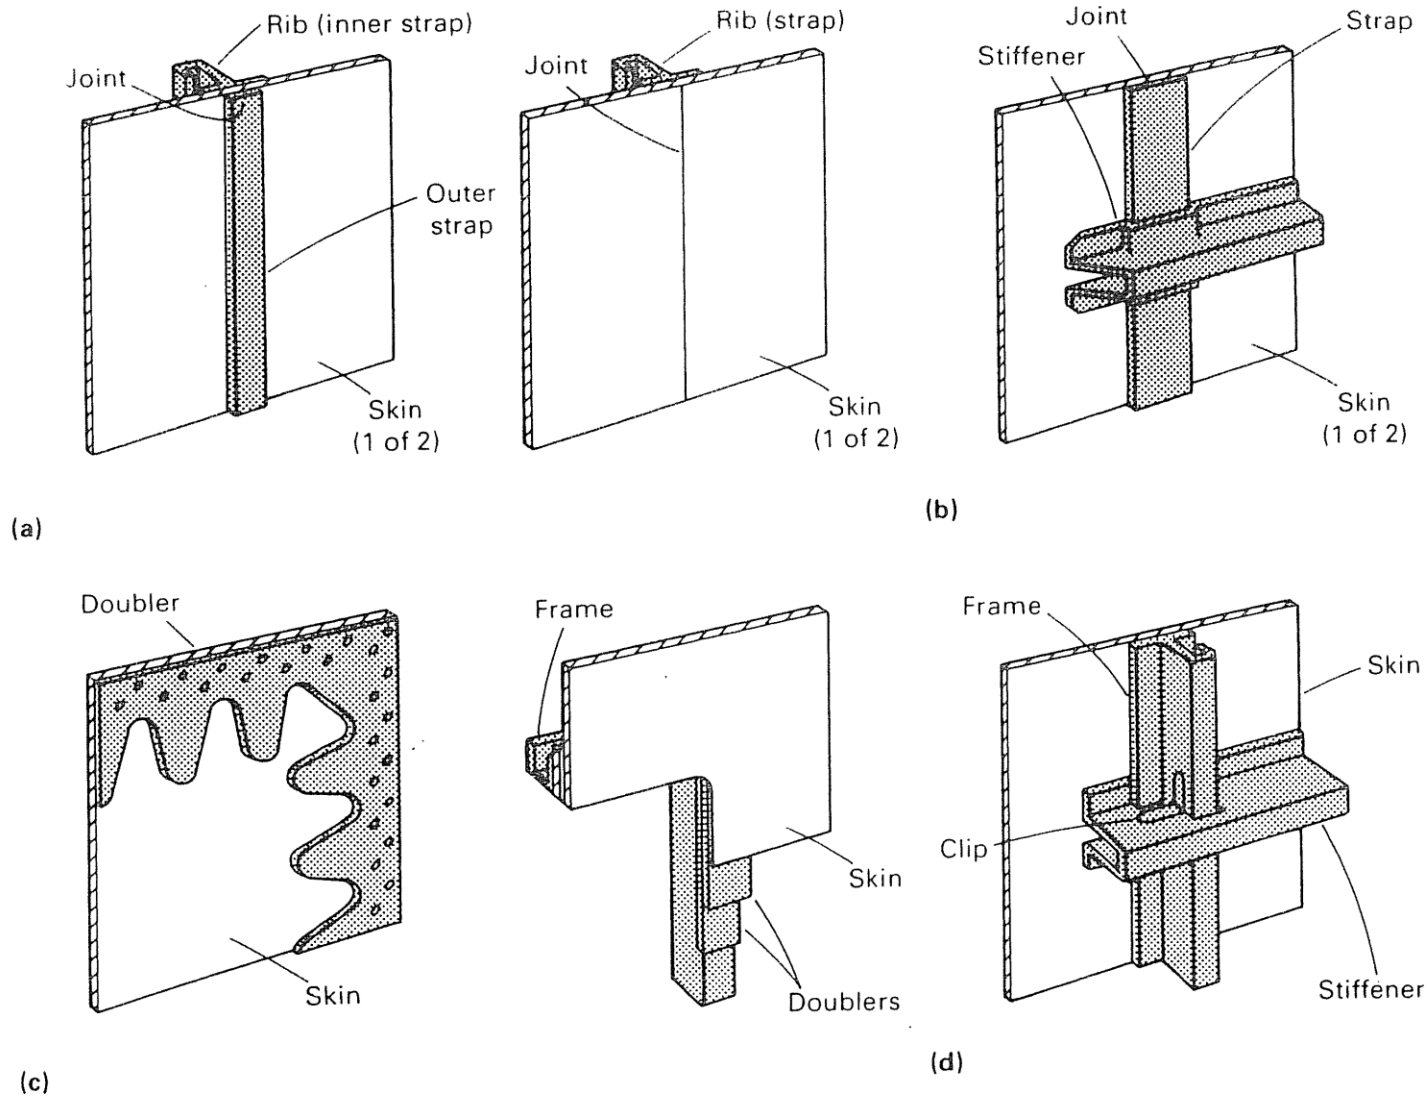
Some typical adhesive-bonded joints used to join components in structural assemblies. (a) Skin splices. (b) Stiffener runout. (c) Bonded doublers. (d) Shear clip
